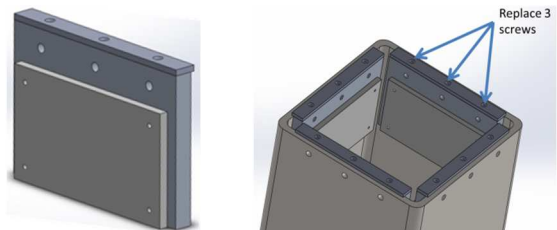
Left: Bearing carriage with polymer bearing pad shown in light grey. Right: Four bearing carriages installed on translator, carriage module removal indicated.
